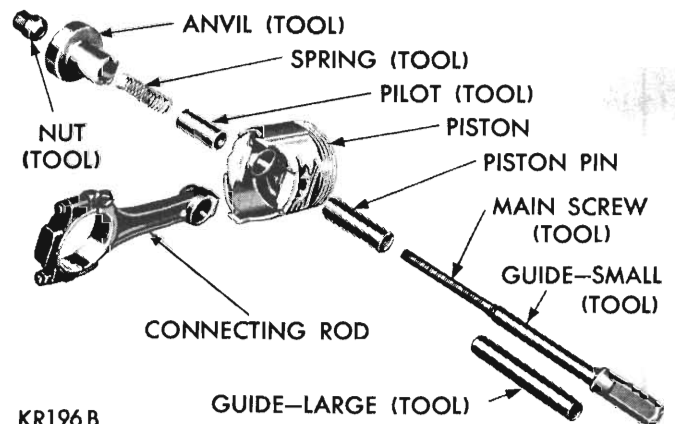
Tool arrangement for installing piston pin (Tool E9C50B)
